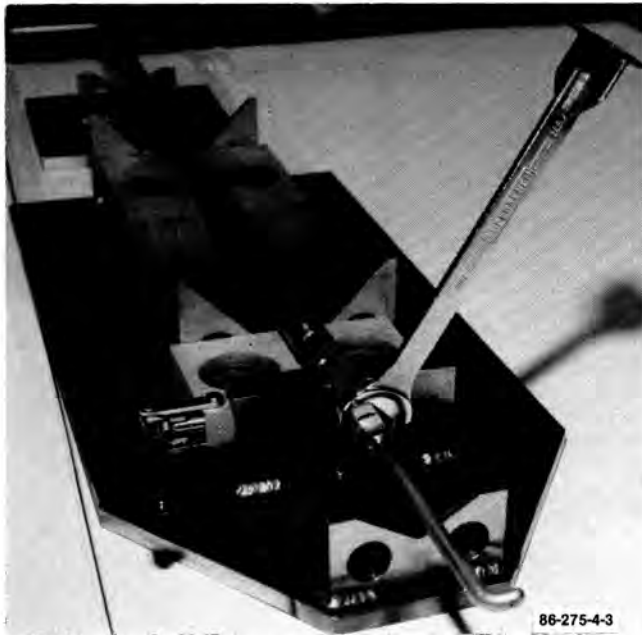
The Core Barrel Disassembly Machine being used to cut out casing from core barrel in TAN Hot Cell.
